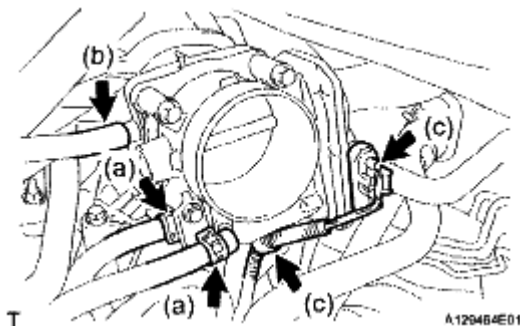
Identifying Throttle With Motor Body Assembly Connector & Clamp
